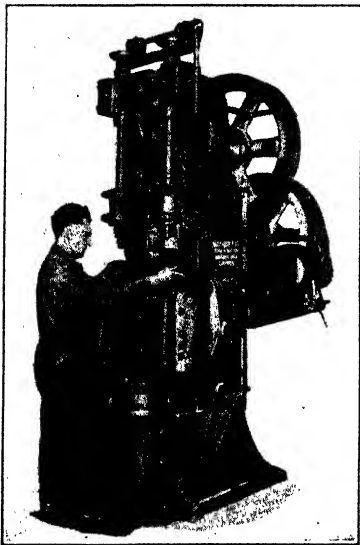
A riveting press, with built-in hydro-pneumatic pressure equalizing equipment. (Courtesy Marquette Tool & Mfg. Co.)
